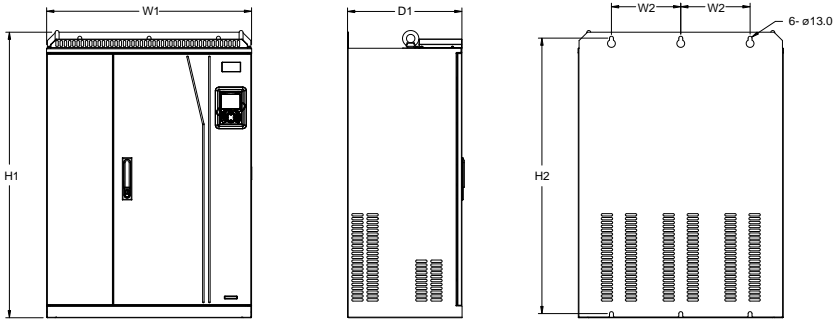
Wall-mounting diagram for 660V 250–355kW models
